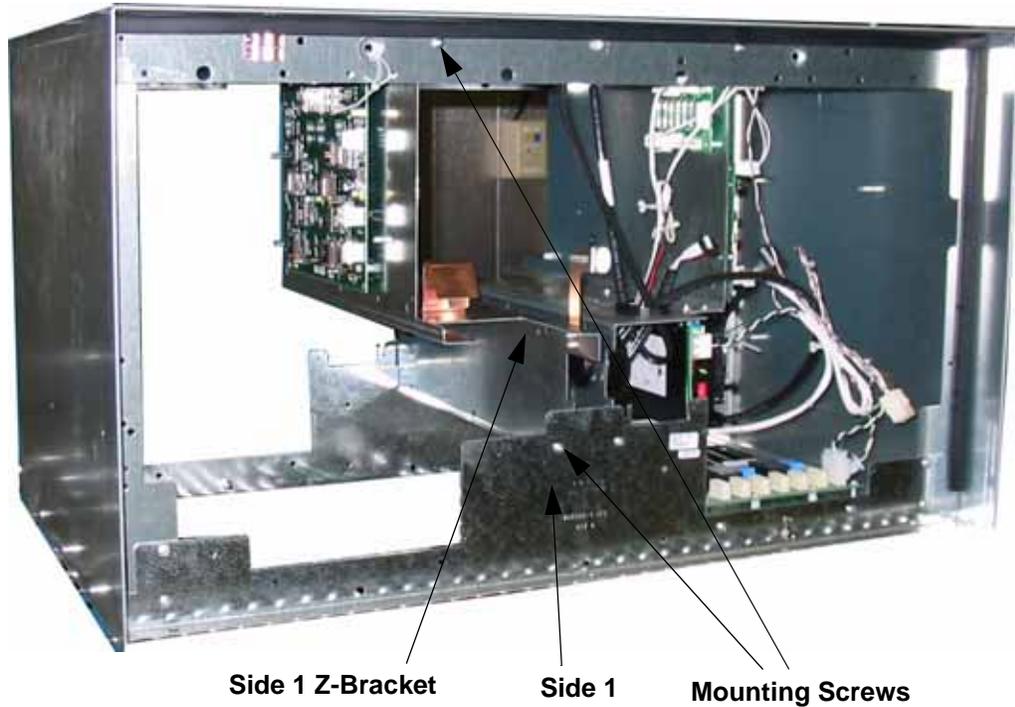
Z Bracket with CAT Board Head Mounting Position
